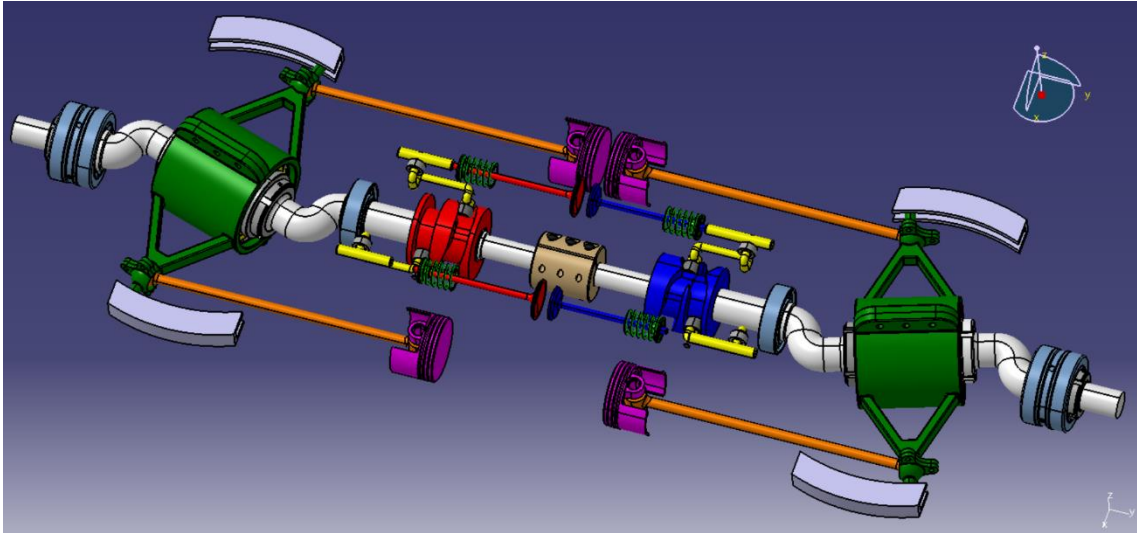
Engine assembly without cylinder and intake valve nut in CATIA V5
